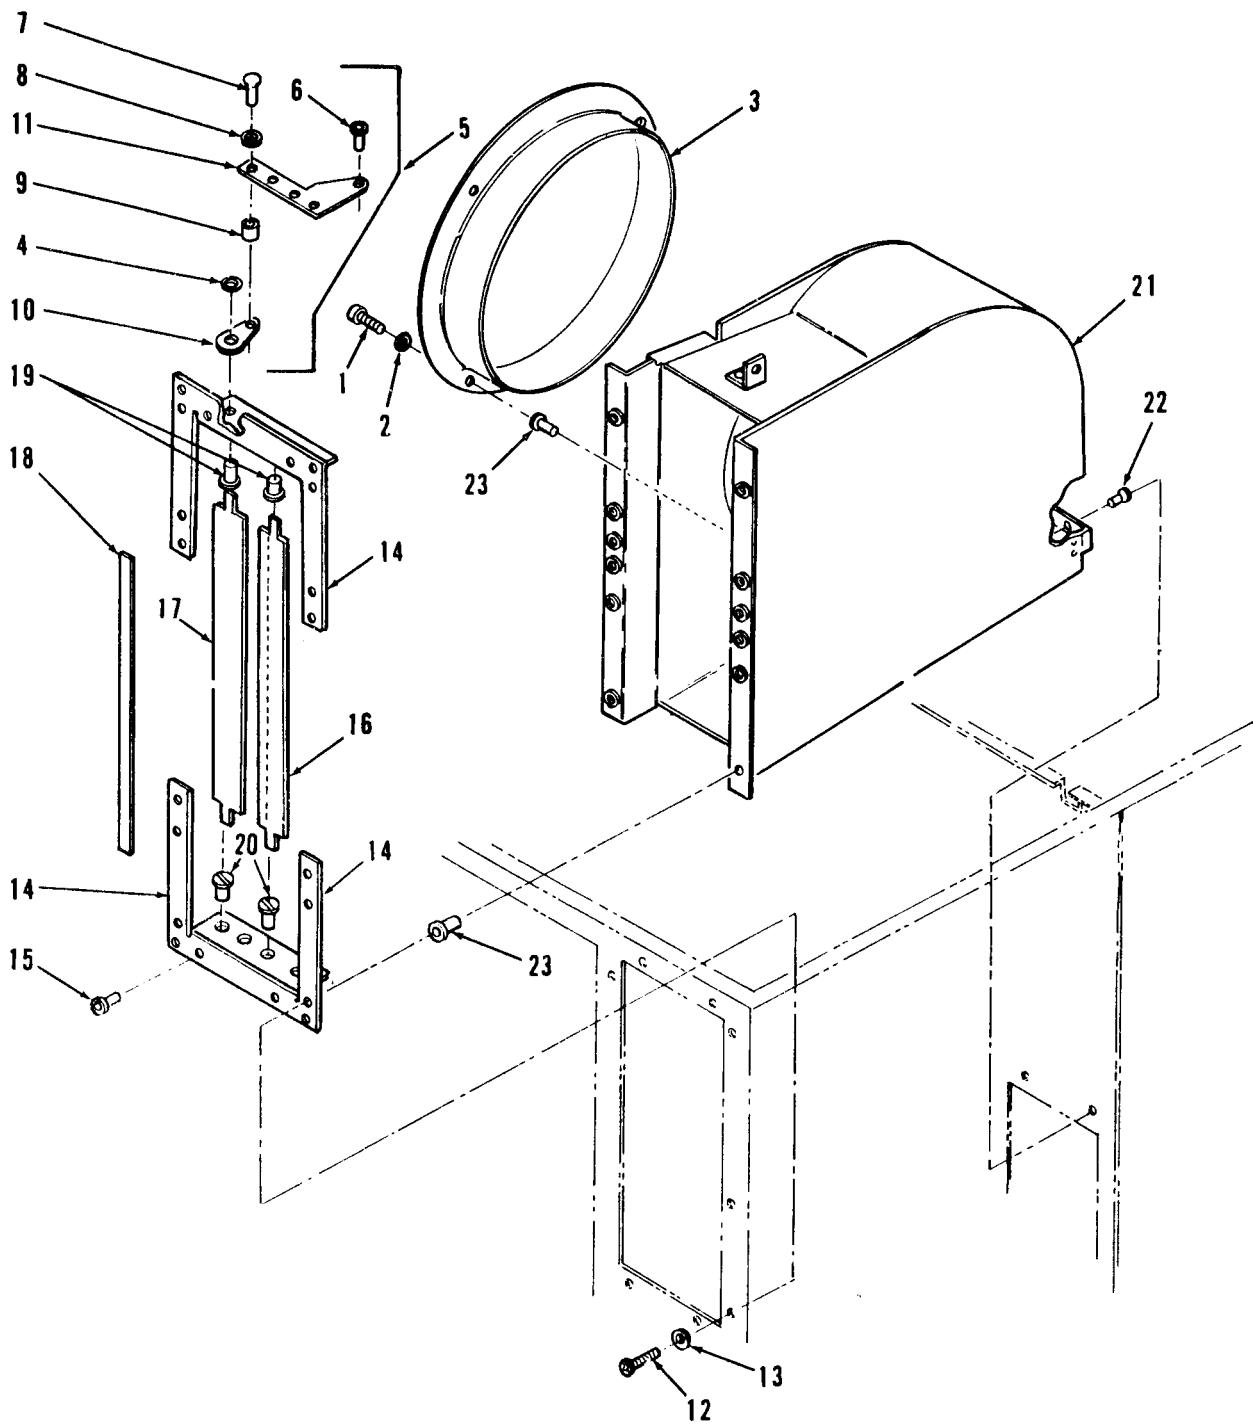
Louver and Condenser Fan Housing Assembly, Left Side
